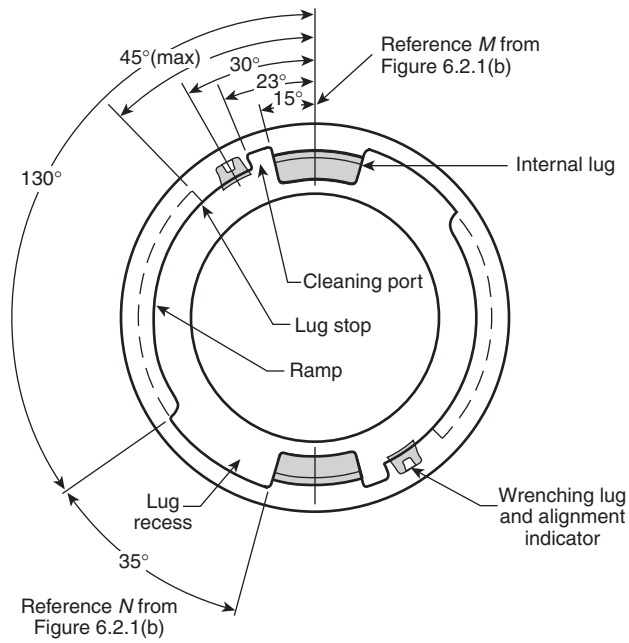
(d) Dimensions for Type B Test (with Lugs Removed).
